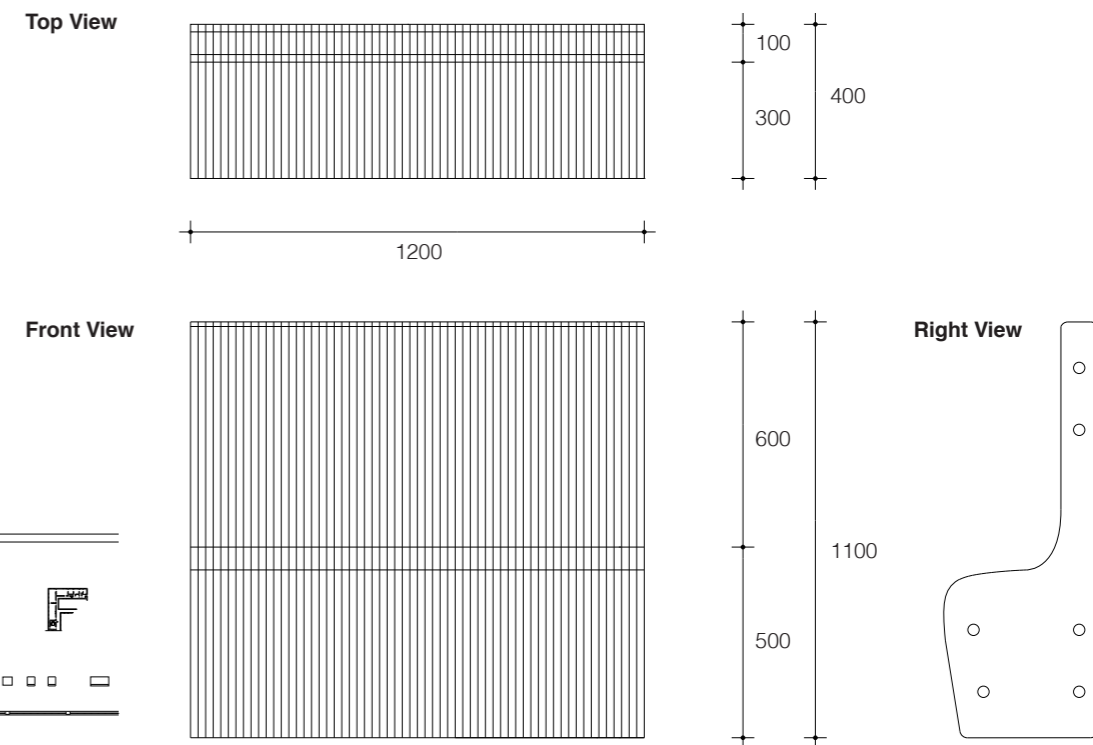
Detailed Drawing of Paper Chair 1 1:10
